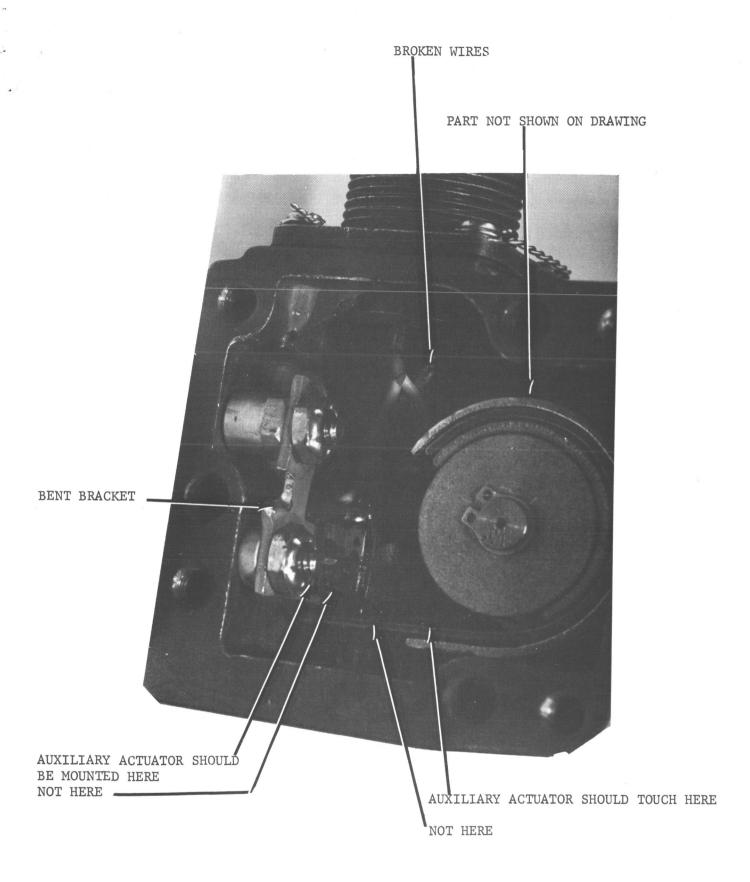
DEFECTS IN PRESSURE SWITCH
